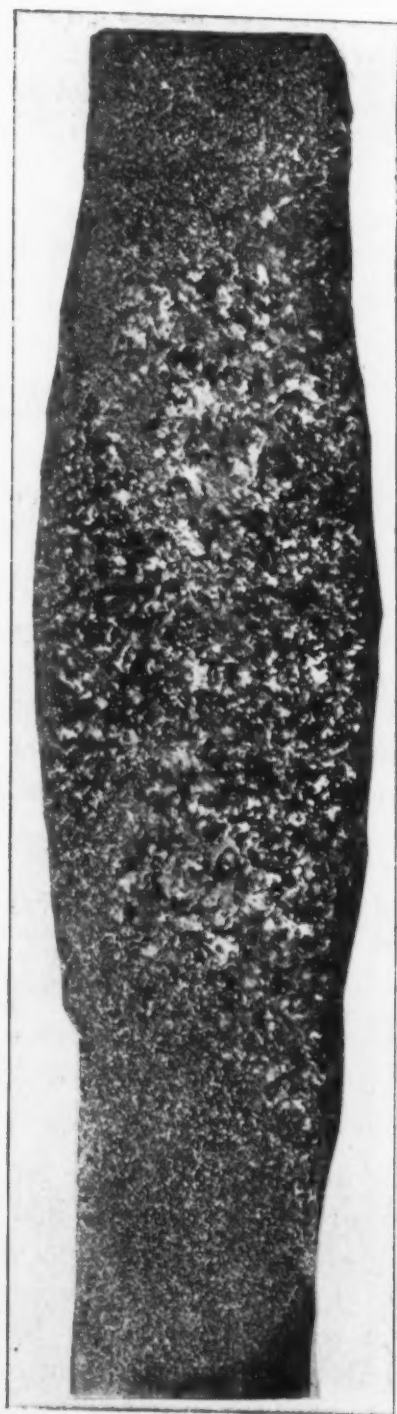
Macrograph of Double "V" Weld in $\frac{3}{8}$ Inch Low-Carbon Steel Plate, Etched with Ammonium Persulphate, $\times 3$.
